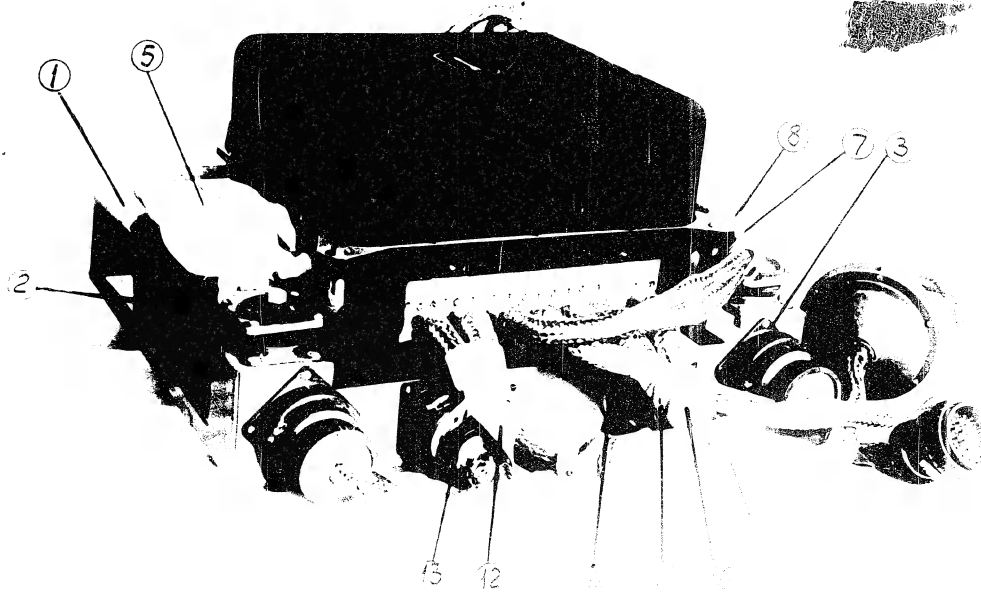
H-2 Gyro Unit-to-Mounting Attachment
